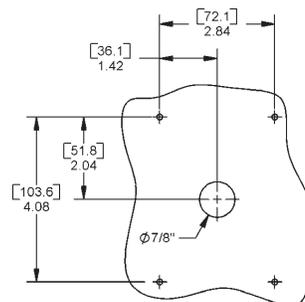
BAPI-Box enclosure mounting holes, rotate 90° for horizontal mount
